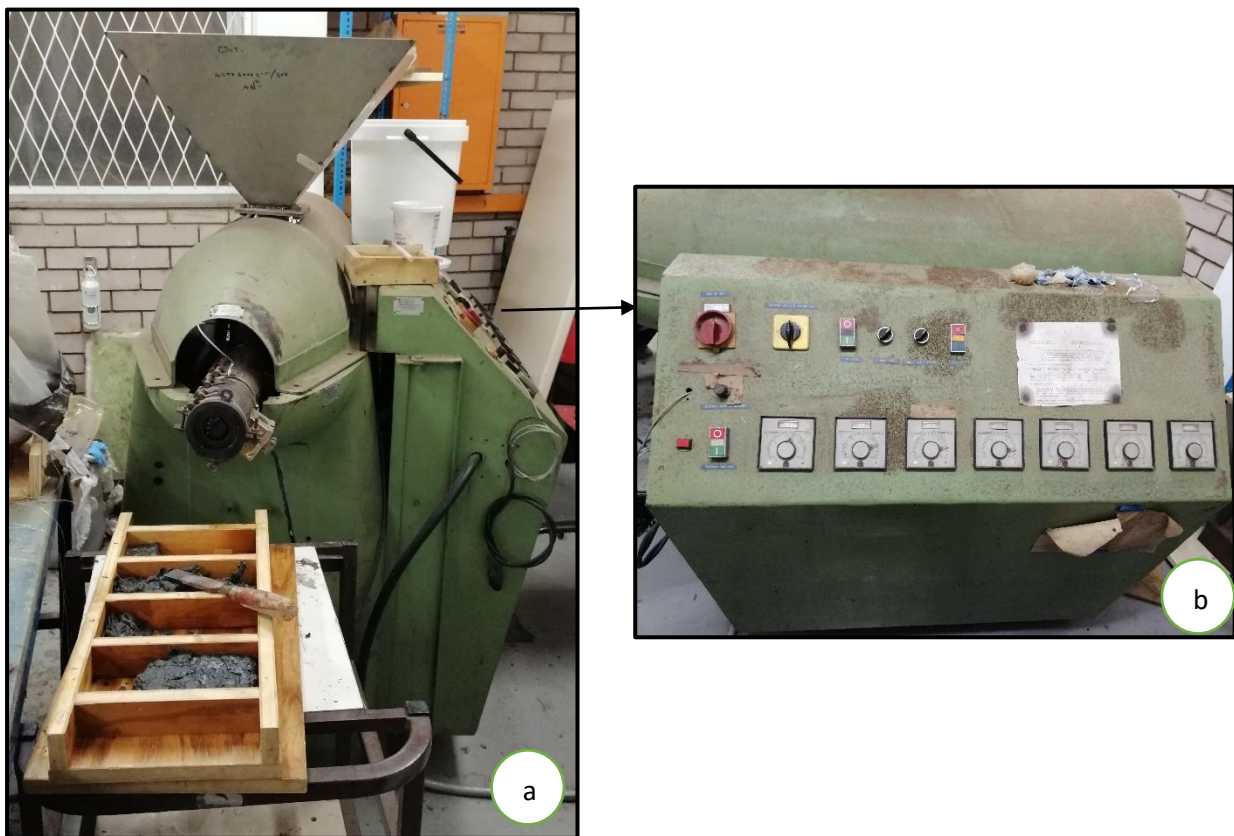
7: (a) Extrusion machine and fabrication setup. (b) Extrusion machine control panel
